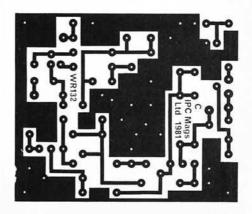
Board 10 (v.f.o.) component layout and p.c.b. track pattern, shown full size
